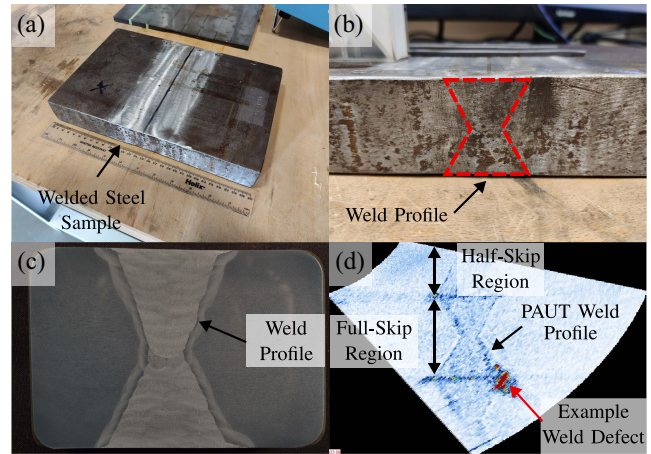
Various images of the NQ butt welded steel sample. (a) Sample overview. (b) Elevation view of the sample with weld region marked. (c) Macro image of a chemically etched section of the sample with weld region marked. (d) Representative PAUT sectorial scan taken on the sample with a clearly visible weld region.
